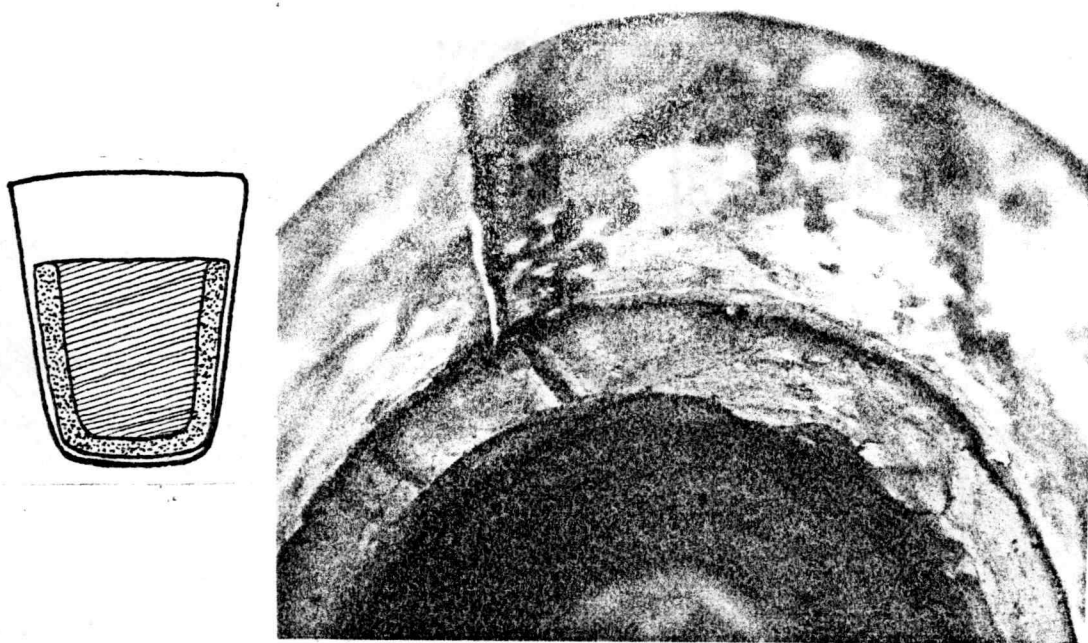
Left, Cross-Section of Pot Pulled Away From Mould Walls Because of Shrinkage During the Drying Process. Right, Photo of Same.
